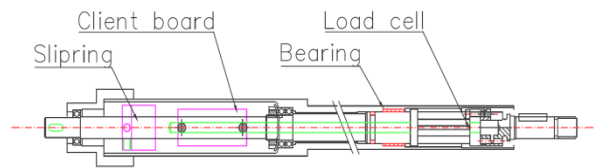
Drawing of shaft system with six-component shaft force sensor
